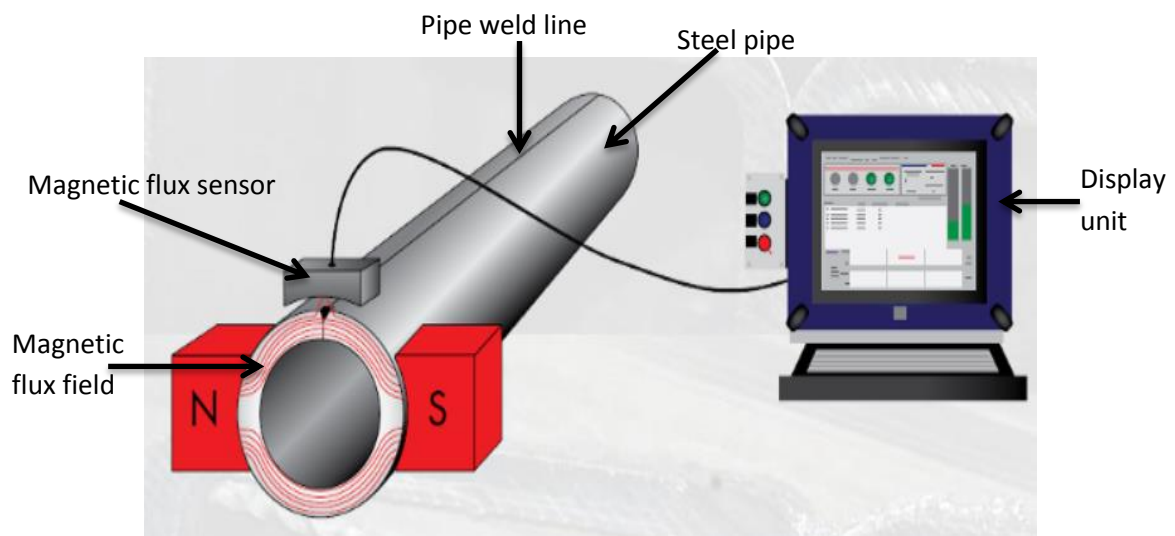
In-line flux leakage test showing how the leaked flux due to a weld is detected by a magnetic flux sensor [50]
